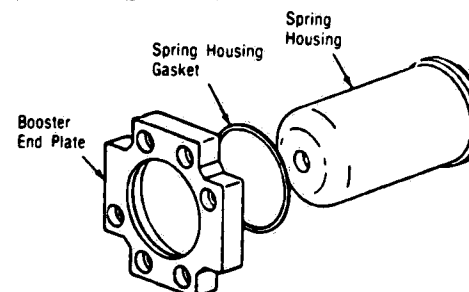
SPRING HOUSING/BOOSTER END PLATE ORIENTATION.
